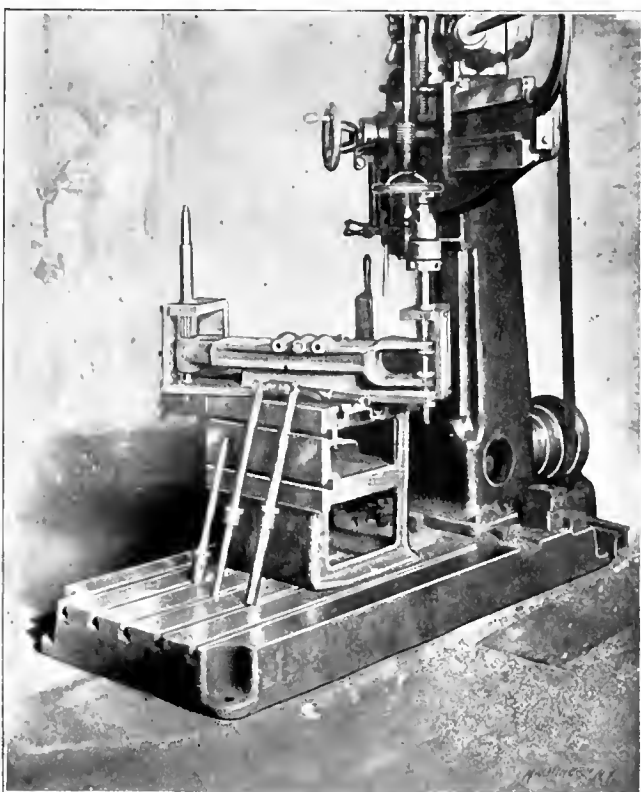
Boring Jig for Boring and Reaming Holes in Rocker Arm.
